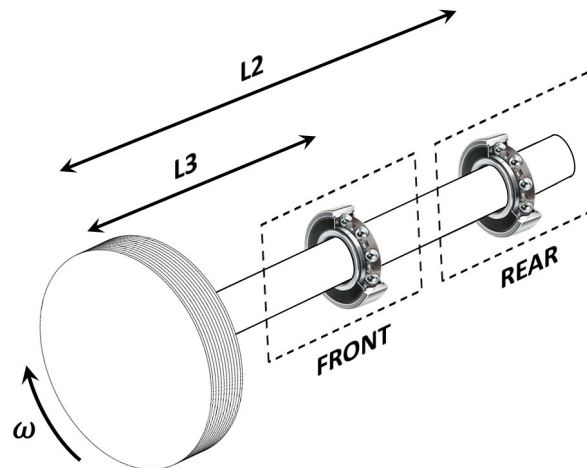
Typical disposition of bearings supporting a shaft in a FEAD.
